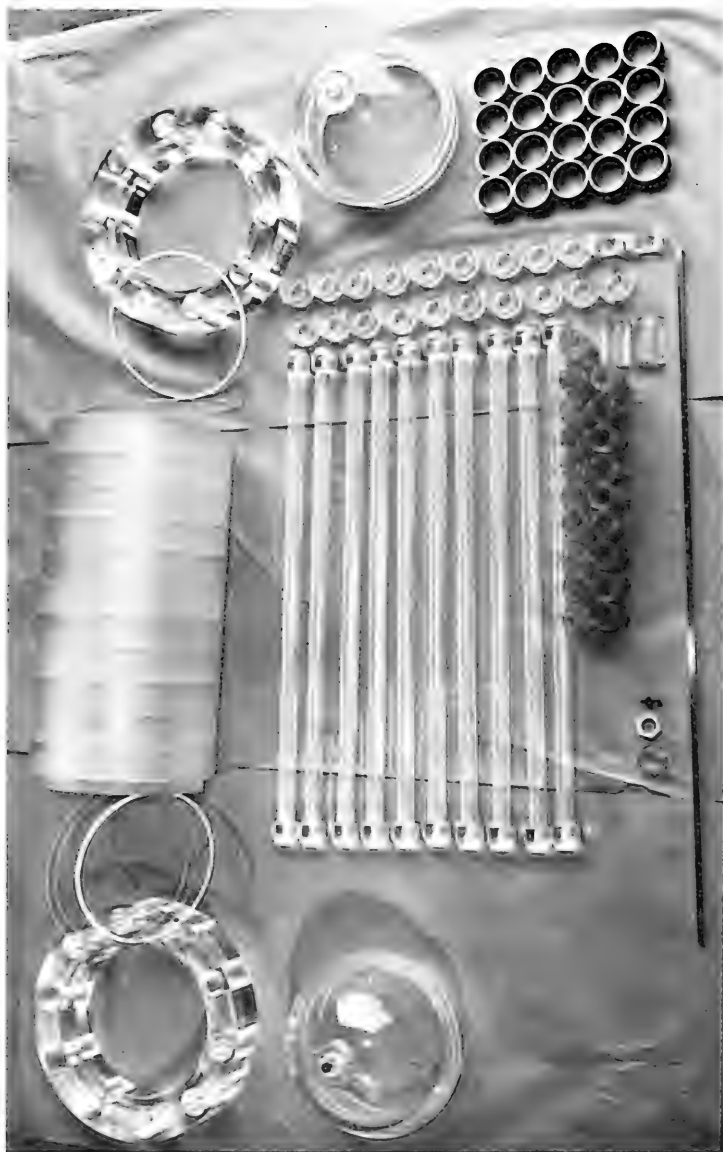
The stacked-ring acrylic pressure vessel model, disassembled.
